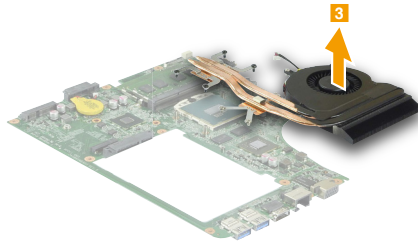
Removal steps of fan assembly and heat sink assembly (continued)
